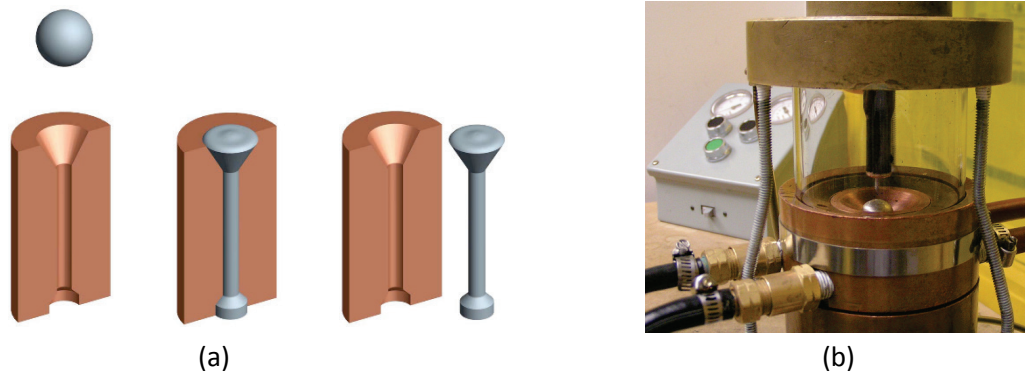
Cast pin tear test in (a) illustrative example and (b) photo showing test setup [27] .
